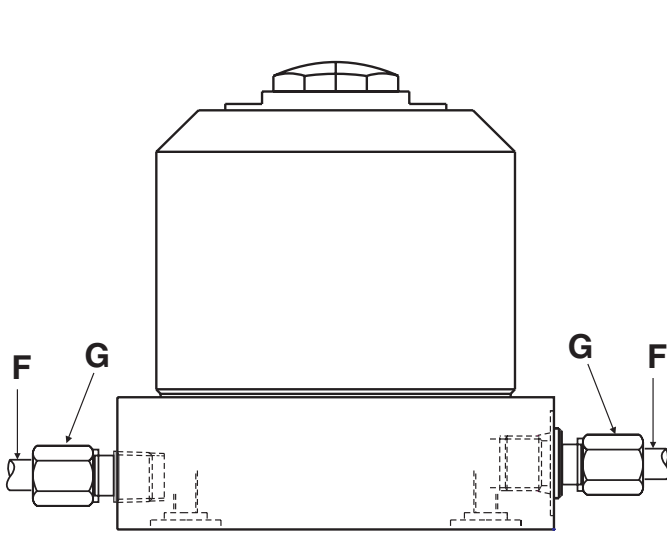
"Air Purge" / "Air Spring" Work Support using Side Breather Port
